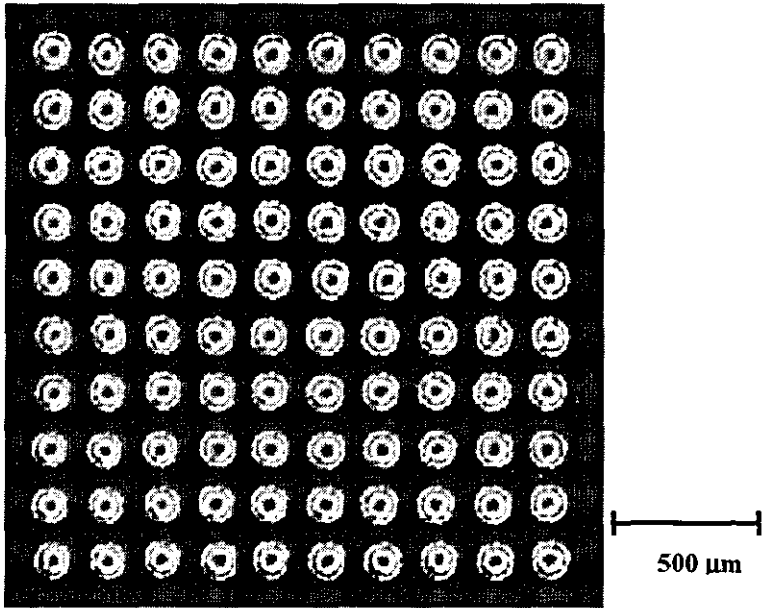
60μm diameter bumps of tin/lead solder deposited onto 100μm diameter pads, metal system number 2
